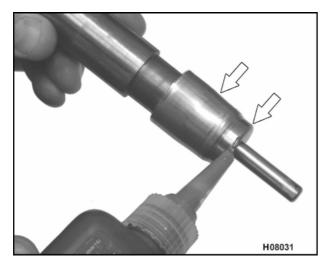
Applying Loctite[™]620 sealant to fuel injector sleeve
